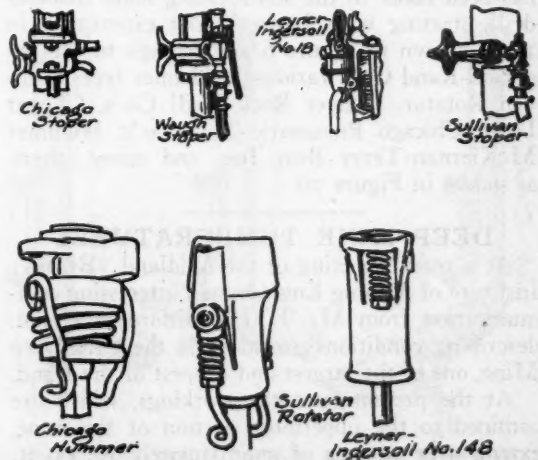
THROTTLES AND FRONT HEADS OF MODERN HAMMER DRILLS.
